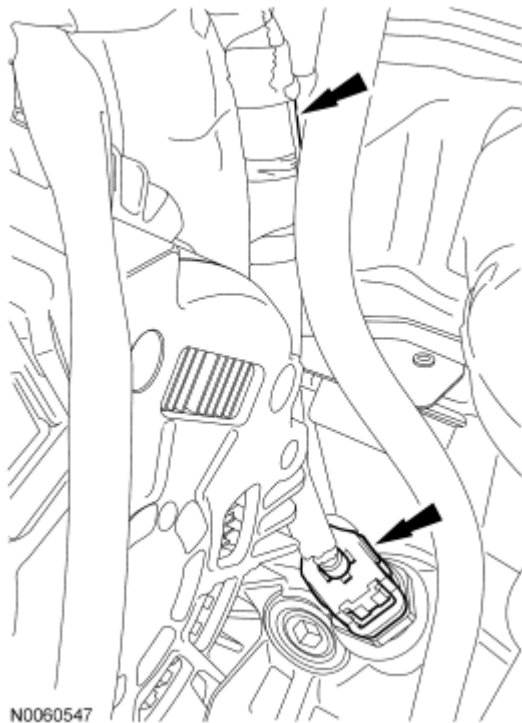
Identifying Engine Oil Pressure (EOP) Switch Electrical Connector & Wiring Harness Retainer
